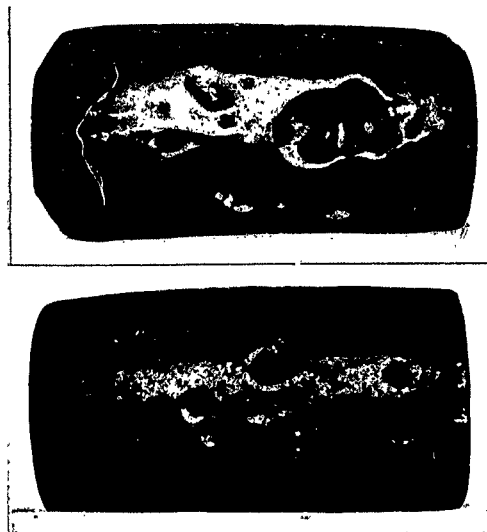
Pock Marks on Cylinders. These are most extremely indented cylinders. Top: Tower 1 (2-in. wall) Bottom: Tower 2 (2-in. wall)
